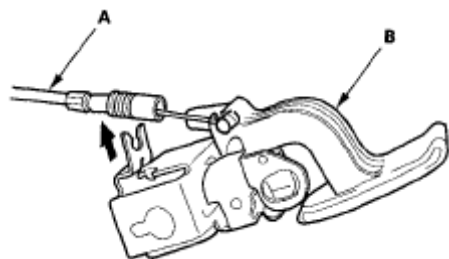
Identifying Trunk Lid Opener/Fuel Fill Door Opener Cable
